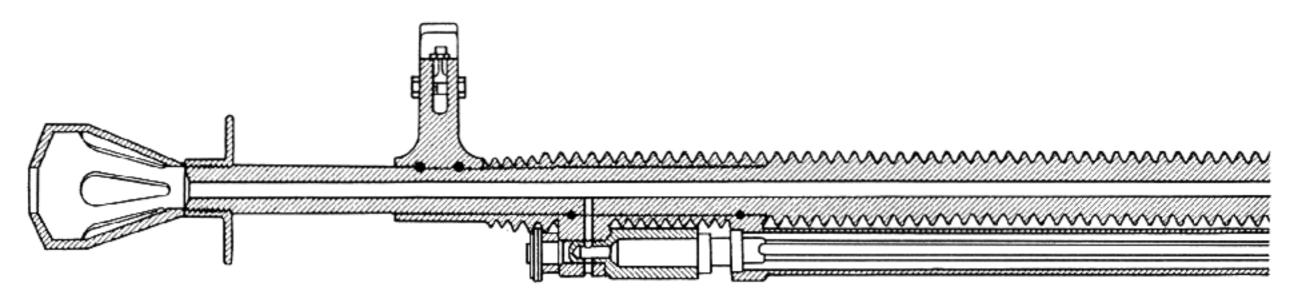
The DShK Heavy Machine Gun, sectional view.
